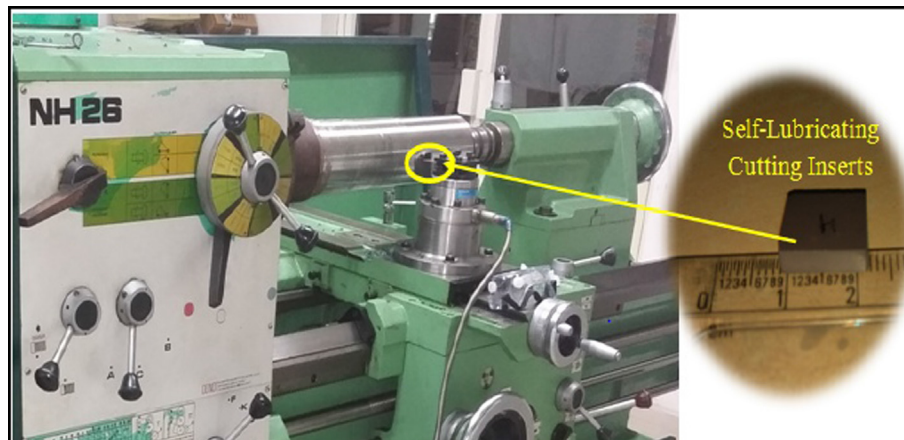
N-26 Lathe and self-lubricating cutting insert.
